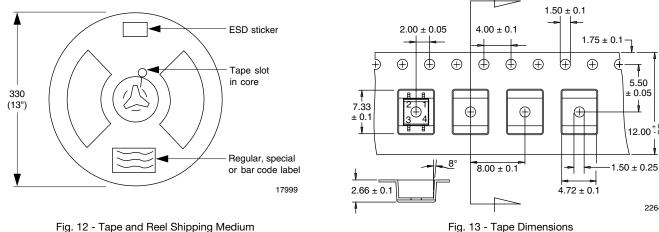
Tape and Reel Shipping Medium (EIA-481, revision A, and IEC 60286), 2000 units per reel
